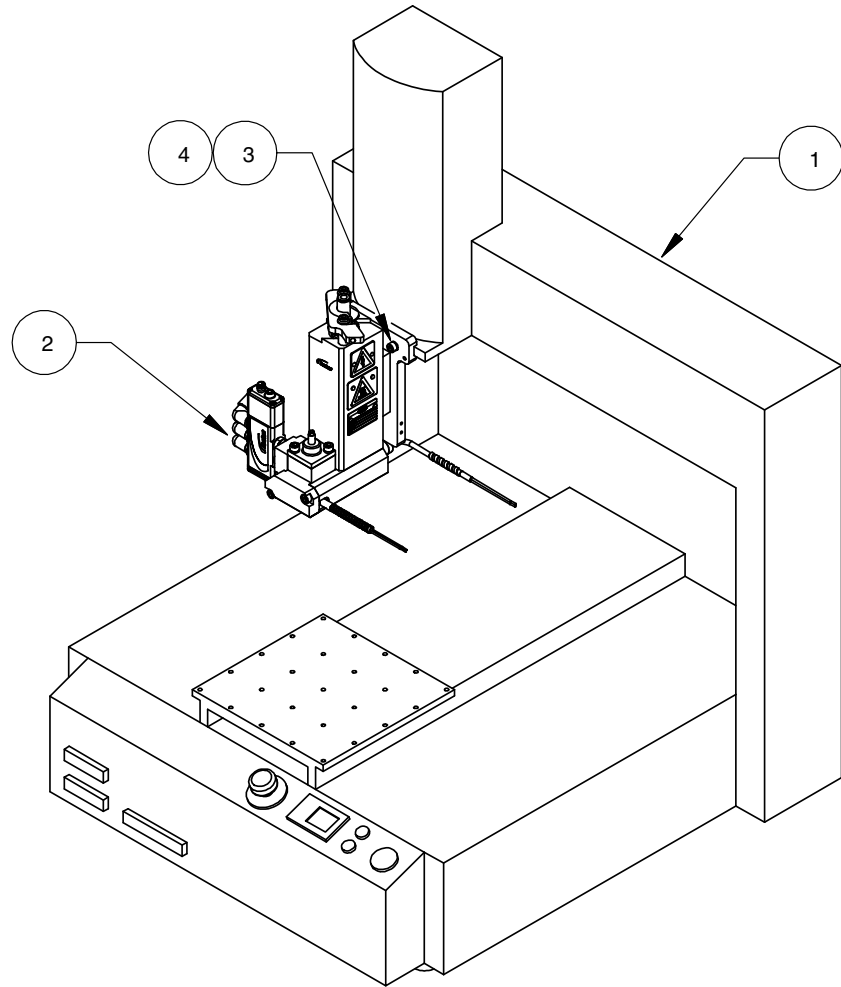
Installing a PJ30 applicator on a robot (gantry-style robot shown)
